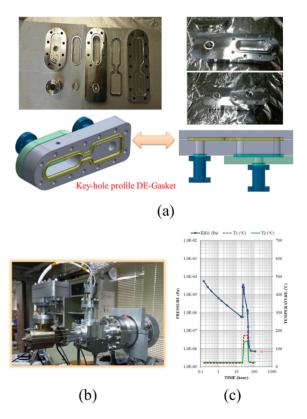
Pictures of (a) the Al reducer flanges with the key-hole profile DE-gasket, (b) assembly test UHV system for the key-hole Al-flanges, and (c) pumping down curve in which the arrow indicates the ultimate pressure.
